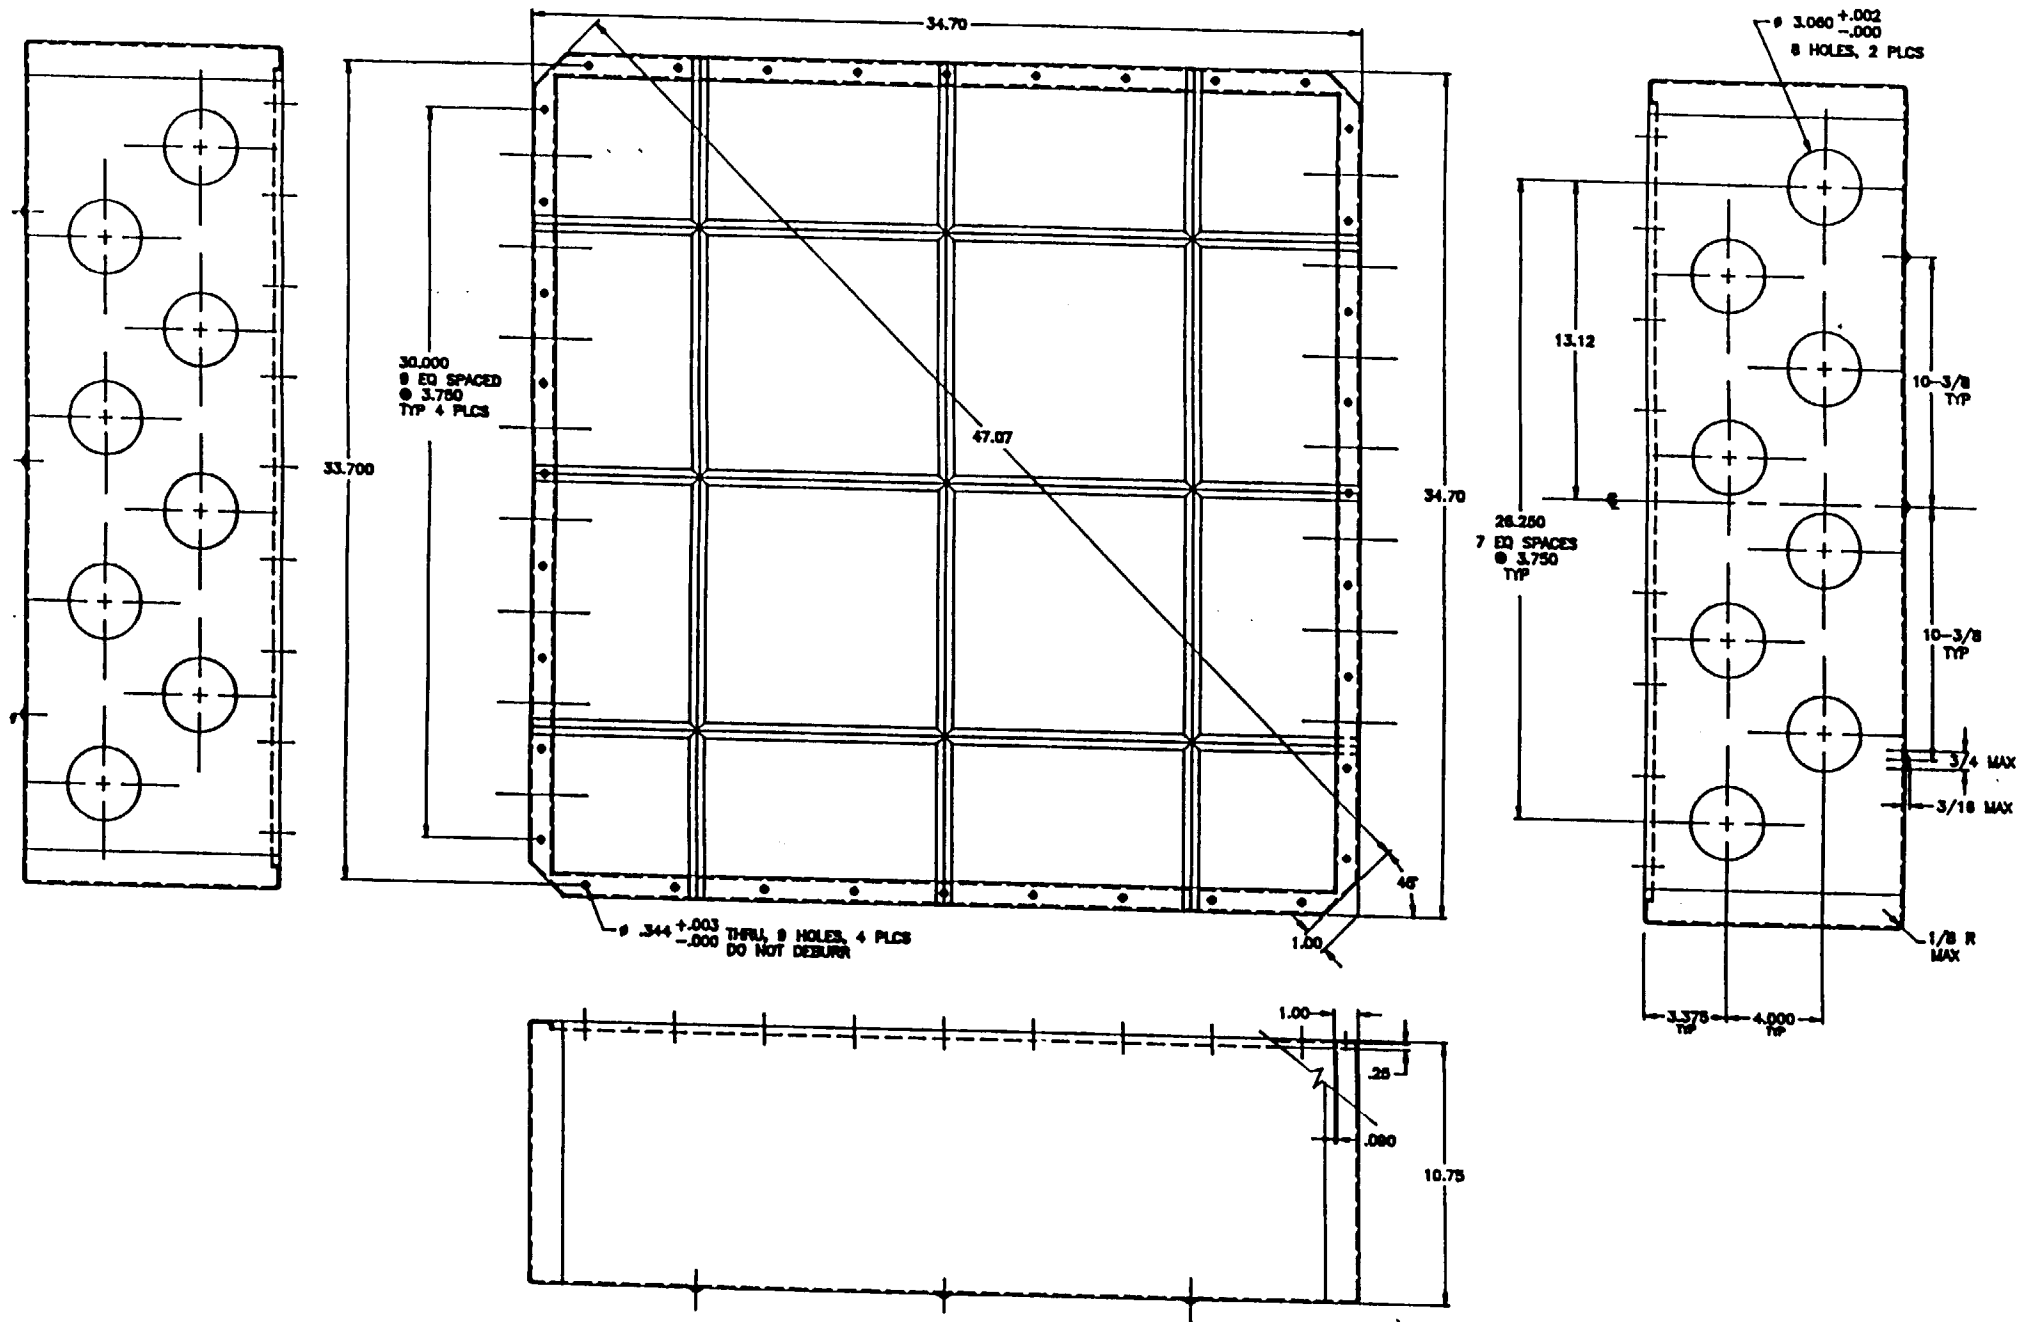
Engineering drawing of the C1 and C2 Cherenkov counter boxes for ISOMAX.
